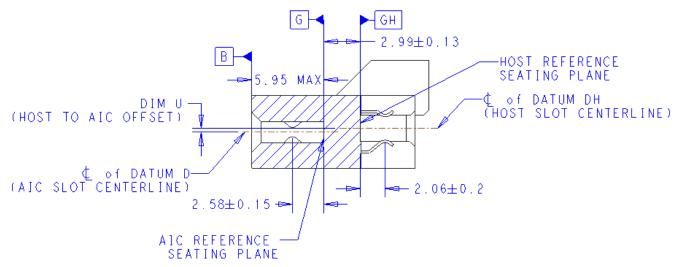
SECTION A: STRADDLE MOUNT CONNECTOR SEATING PLANE DIMENSIONS (MM)
